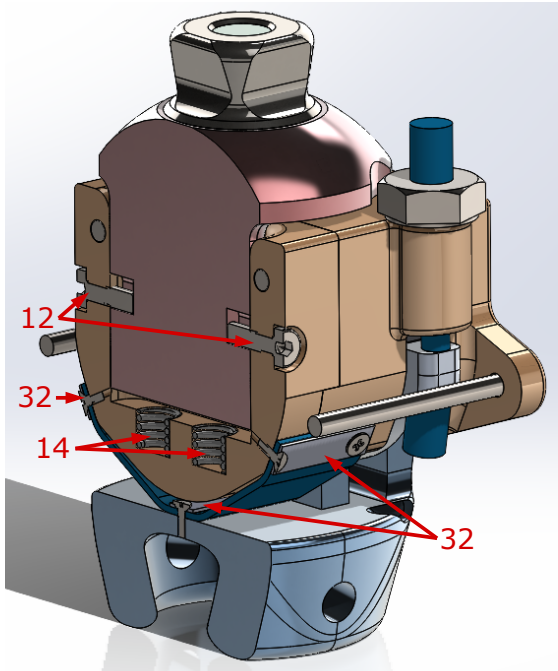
Sectional view of the complete CAD design at the level of the hole for the top slider. (12) Screws limiting the top slider movement, (14) Pre-tensioned springs, (32) Screwed plates that fix the elastic band.
